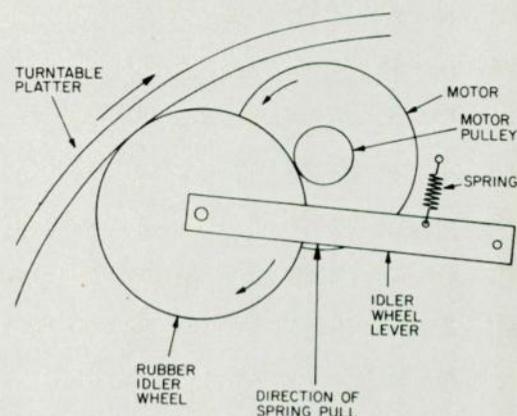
This drive system uses a spring-loaded lever to keep the idler wheel in contact with the motor pulley and the platter rim.
